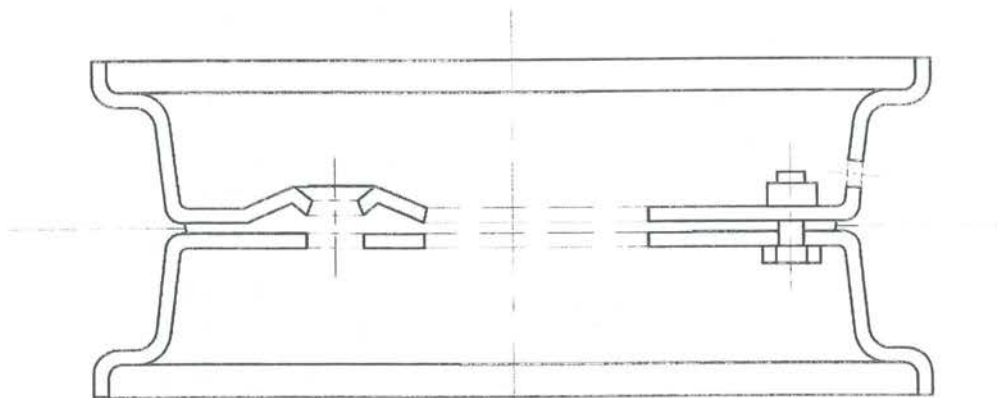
(in part) TYPICAL RIM ASSEMBLIES
